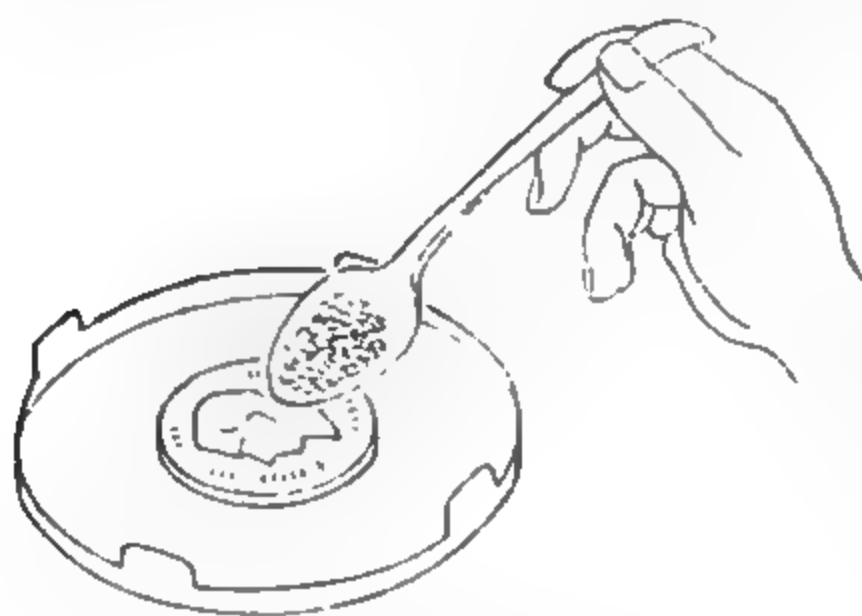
POURING MELTED LEAD INTO A PLASTER MOULD
